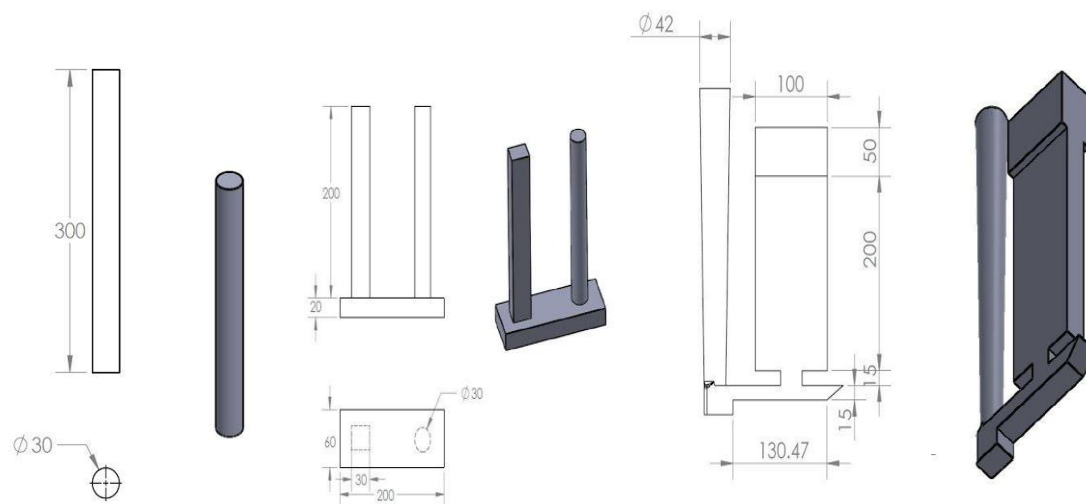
(a) Mold 1 (b) Mold 2 (c) Mold 3
